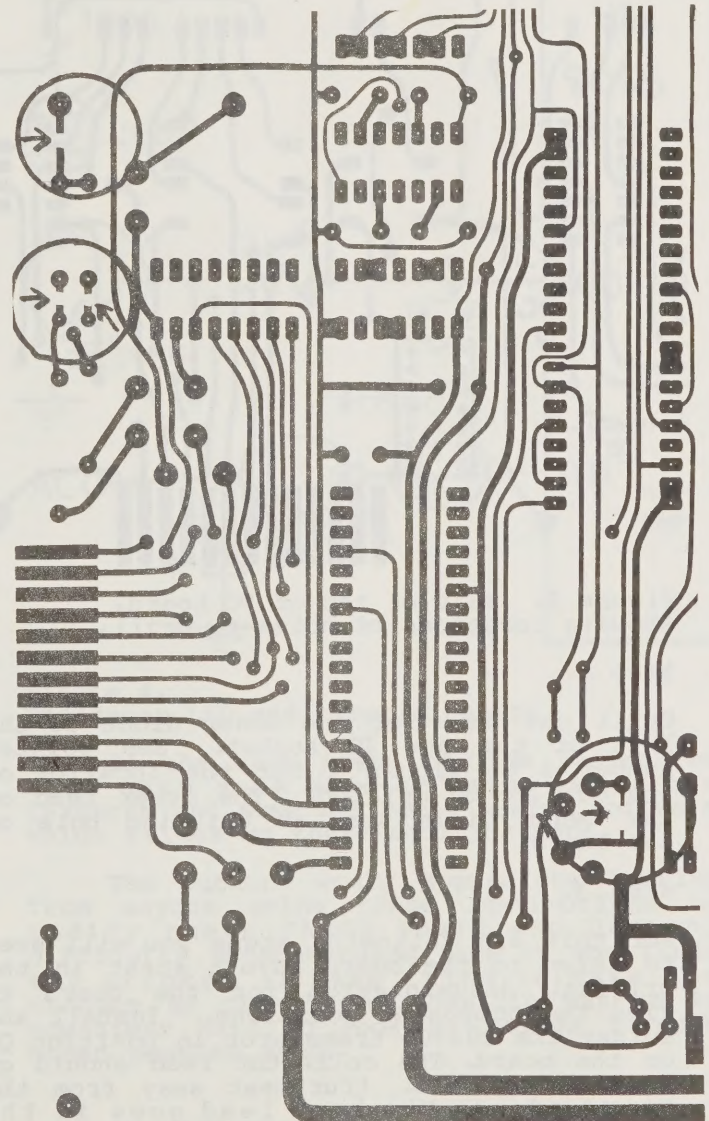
Part of back of PC board. Showing locations of land pattern cuts
